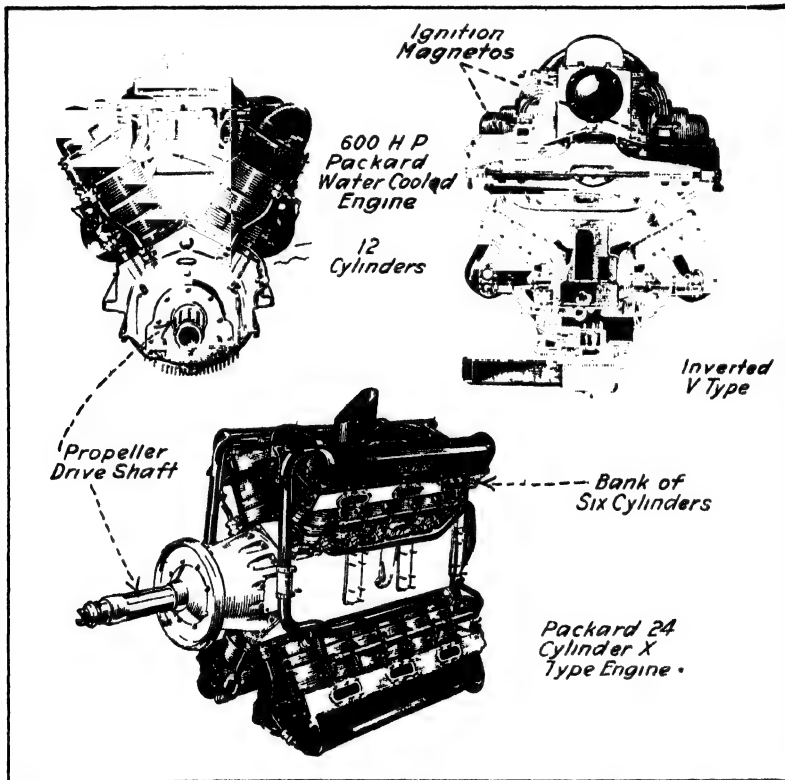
Packard Water-Cooled Aviation Engines Showing Method of Carburetor Mounting.
